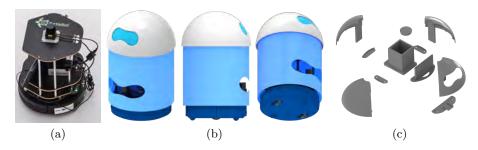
(a) Original Turtlebot 2 available; (b) different renders of housing designed in this project; (c) 3D printed pieces models, including housing parts and support pieces to hold sensors and LEDs.
